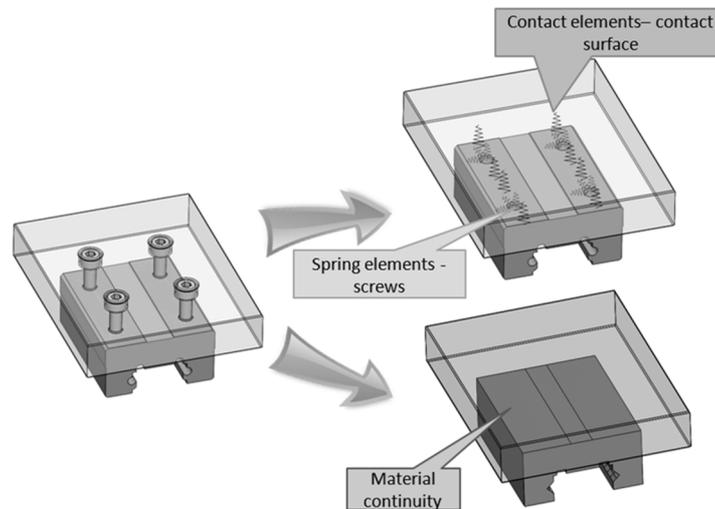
Variants of engineering of permanent connection of a bearing cage with a structural element of a machine tool
